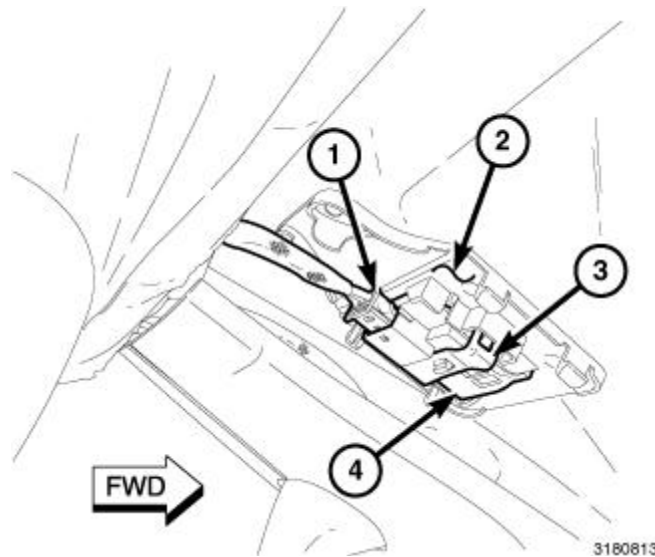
Wire Harness Connector, Humidity Sensor, Bracket & Clip
